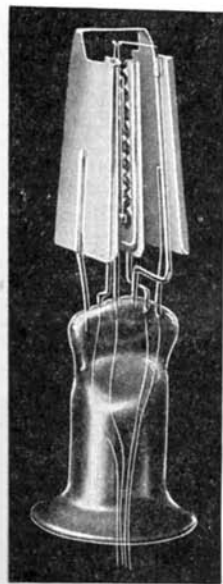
COMPLETE INTERNAL ASSEMBLY WITH PLATES IN PLACE.
